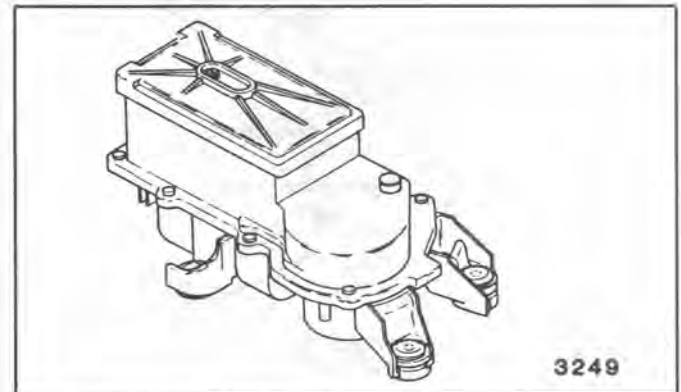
Permanent Magnet Pulse Windshield Wiper Motor
